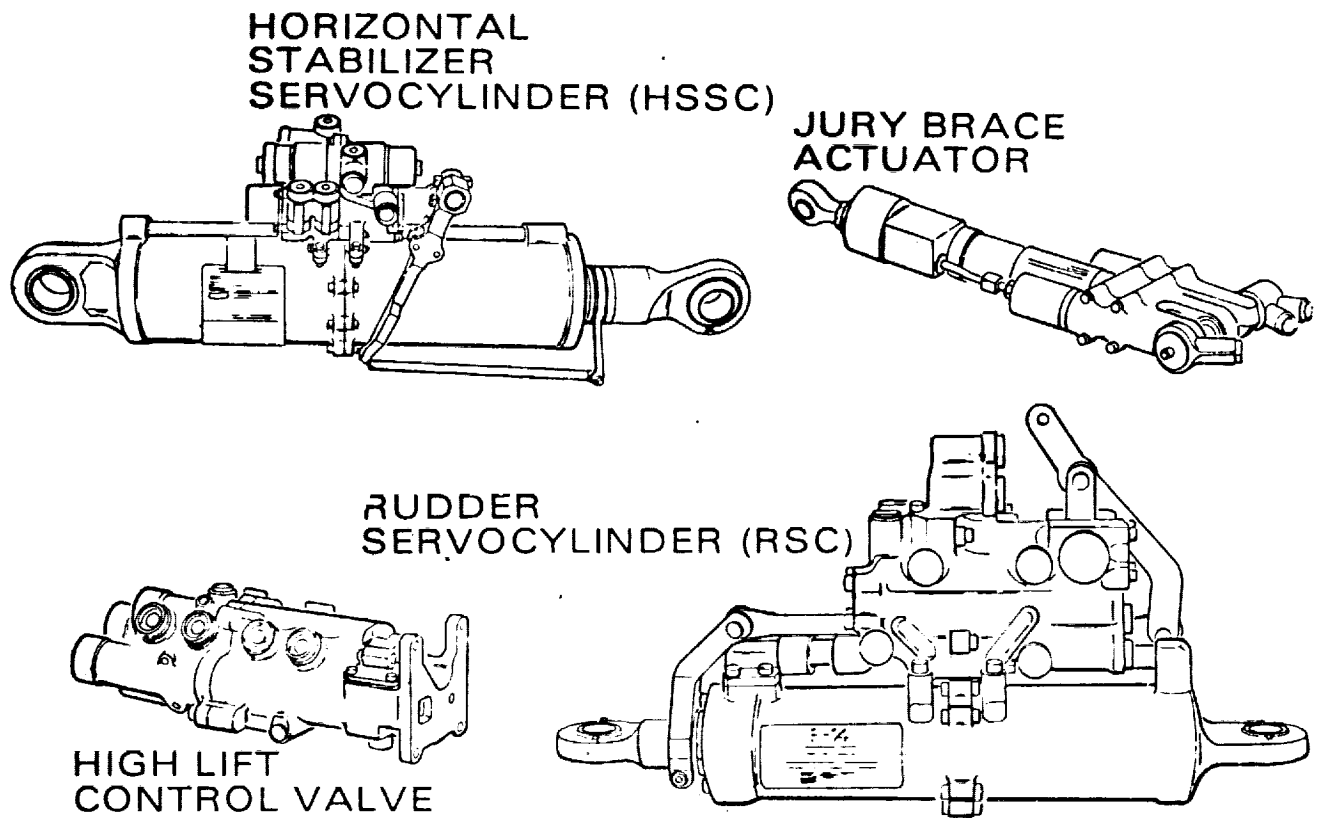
BENDIX EQUIPMENT ON F-14
